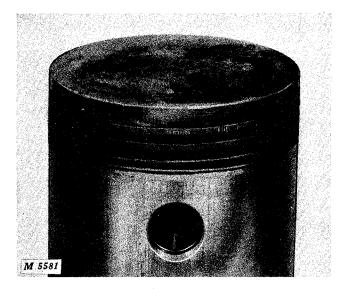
Piston Rings Stuck and Broken Because of Lacquer, Varnish and Carbon Build-Up
